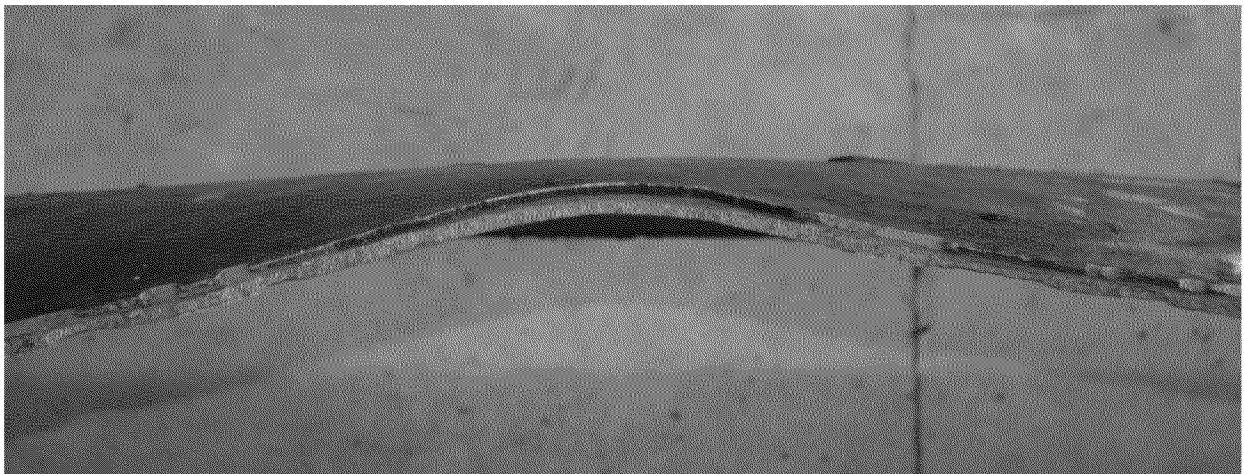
Photograph of the darkened area along the outer diameter (OD) weld at the rupture origin.
